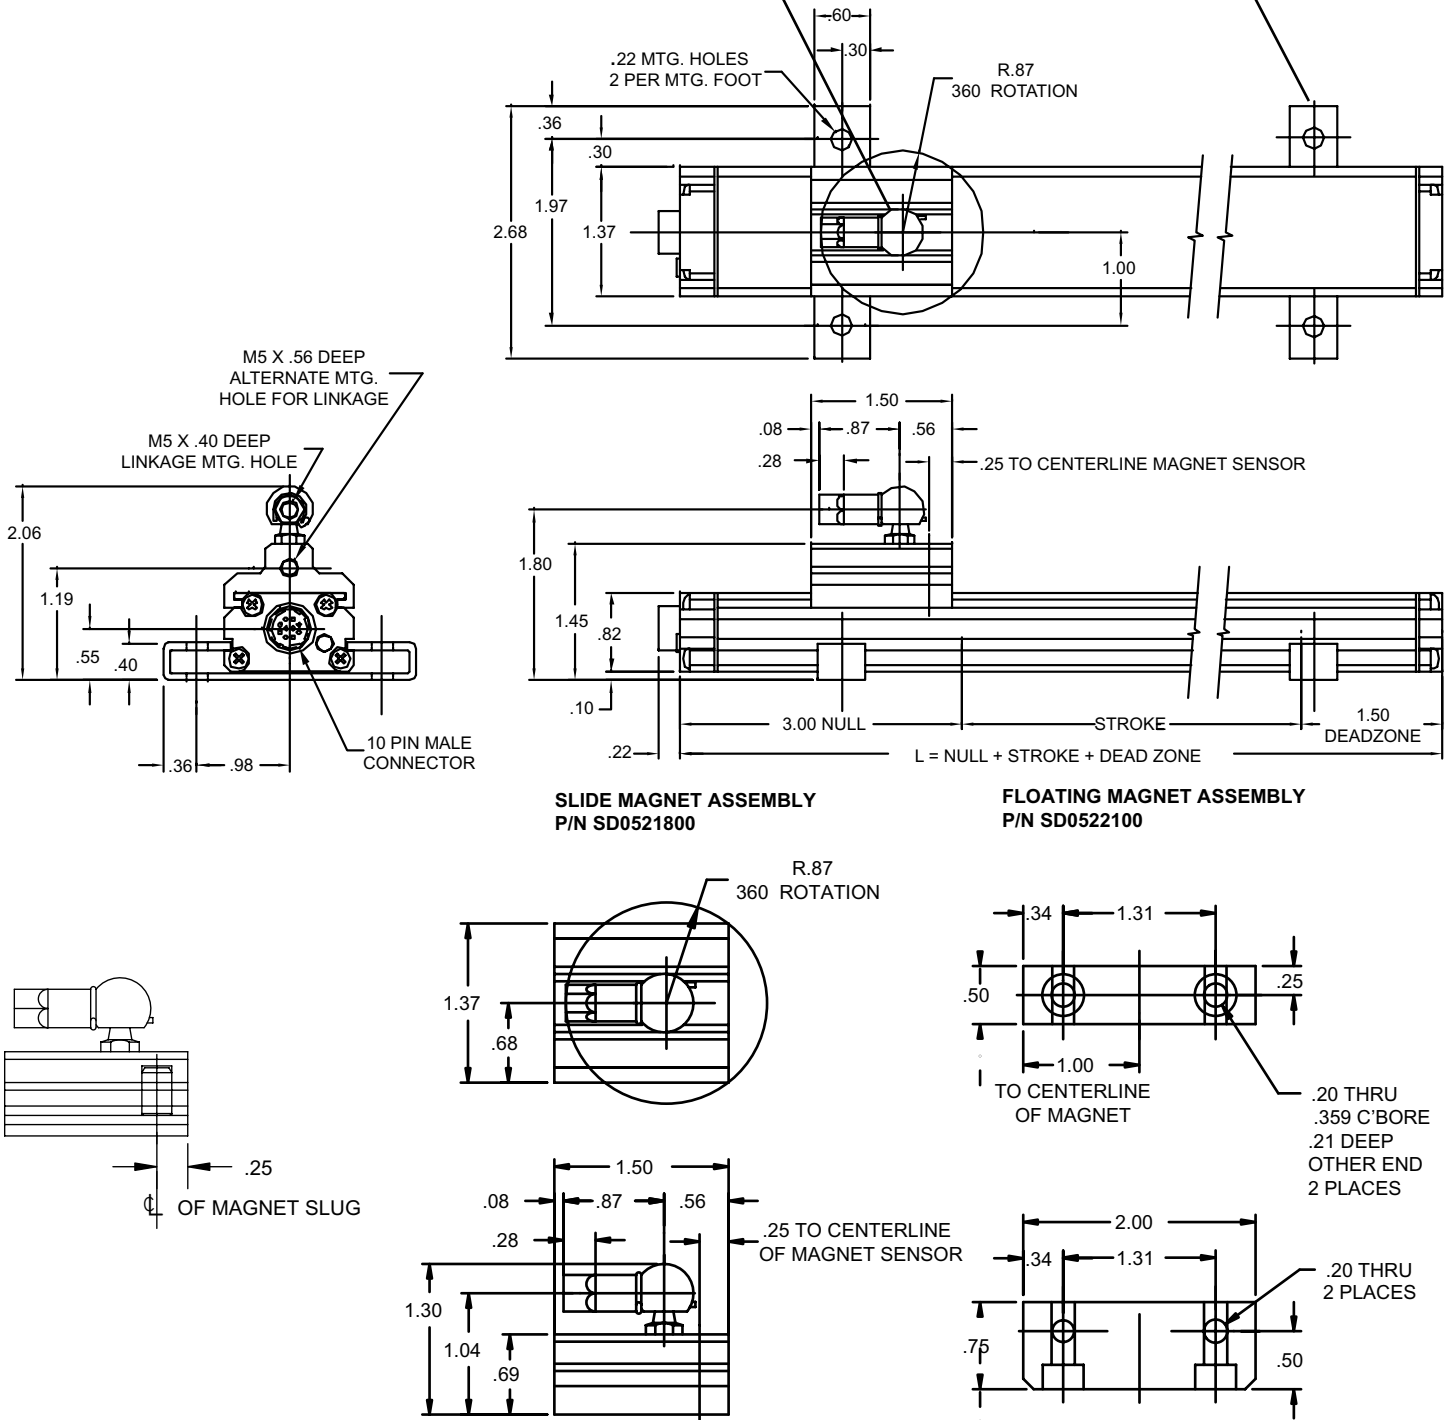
The Brik with Quadrature Output LDT Drawing D0245400
